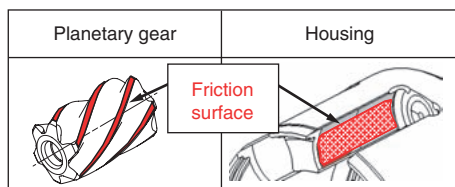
Sliding surfaces of the planetary gear circumference and housing bore
